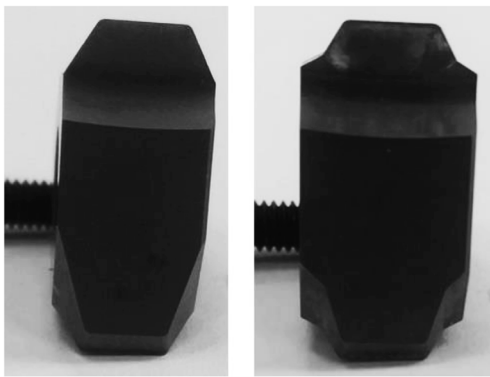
Example of profile cutter which is used for milling the oil groove in bearings – left side: new part; right side: used one with wear marks (from author archives)
